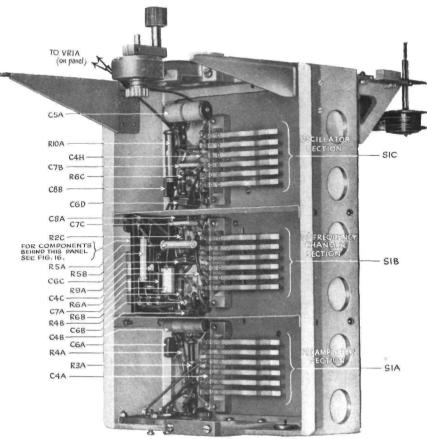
TOP VIEW OF R.F. CHASSIS (Turret Removed).
